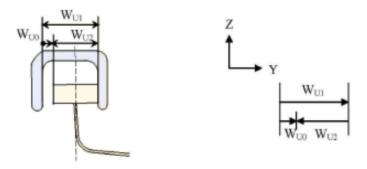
Fitting state(left) and dimensional chain with GD&T(right) in Y axis (upper
